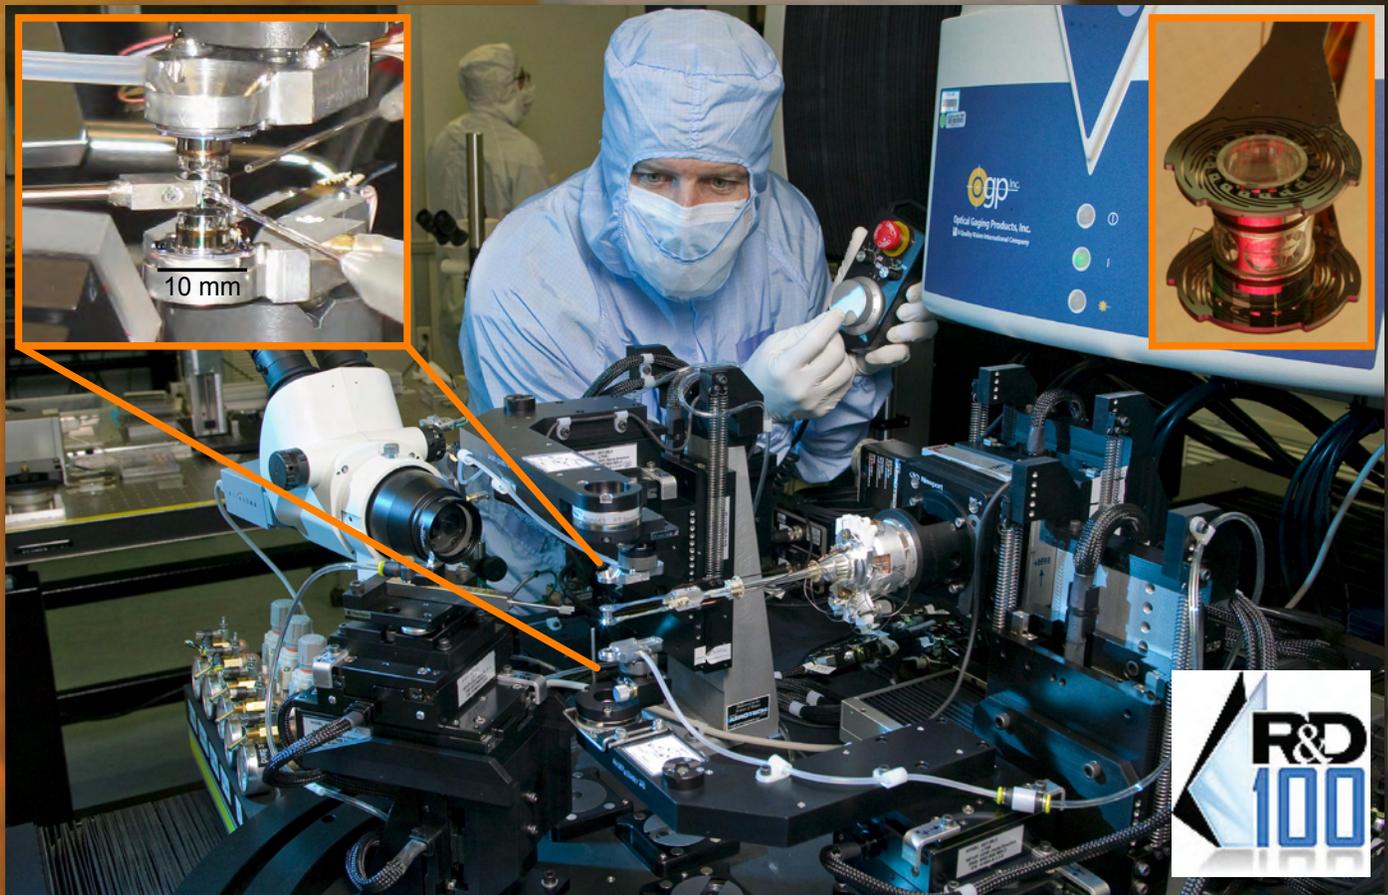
The Precision Robotic Assembly Machine releasing a laser fusion target that was just assembled. Target components being assembled (left inset). A completed target (right inset).
